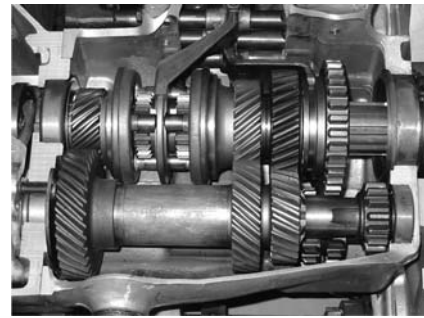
A closer view of the Land Rover gear box shown in Figure 10.9.
